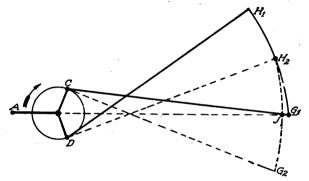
"Crossed Rod" Arrangement of Eccentric Rods in Stephenson Gear
